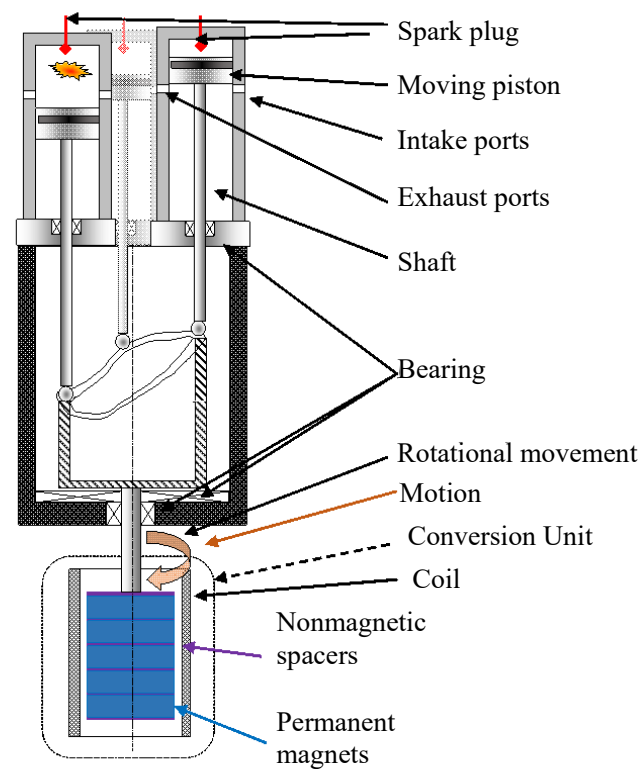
The structure of an alternative combustion engine with linear-to-rotary motion conversion without a gearbox.
